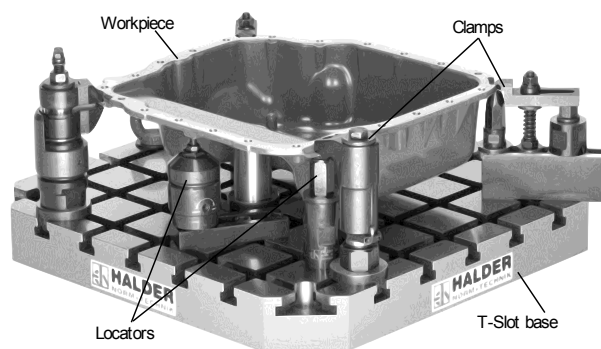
Modular T-slot fixture with locators, clamps and workpiece (picture © D. MENGEMANN SPANNTECHNIK GMBH 2014)
